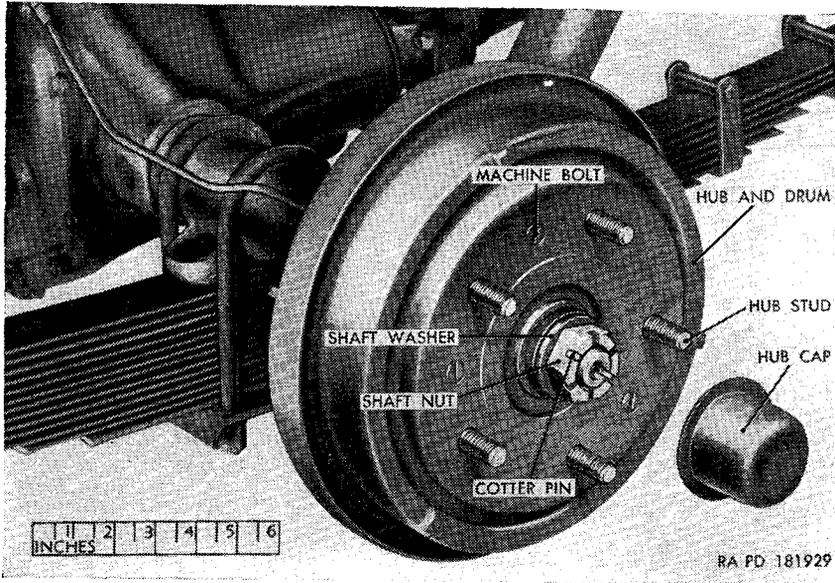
Rear axle with brake, hub, and drum assemblies—hub cap removed.
